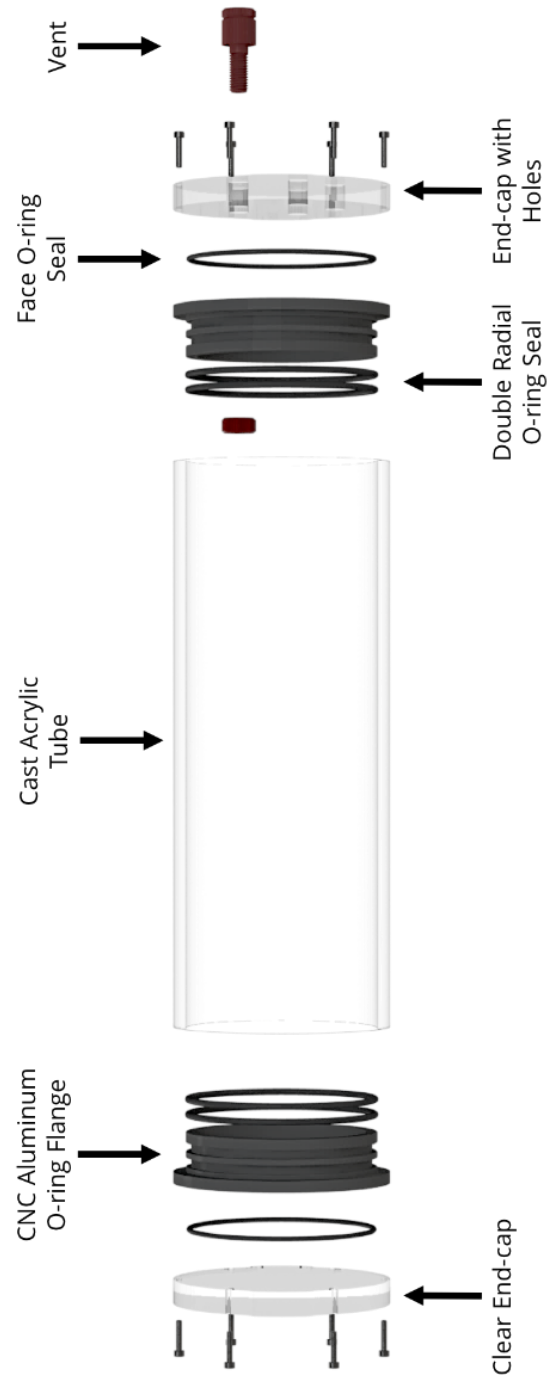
Example of watertight enclosure by the use of radial and facial O-rings and flanges, image modified from Blue Robotics (www.bluerobotics.com) [312].
